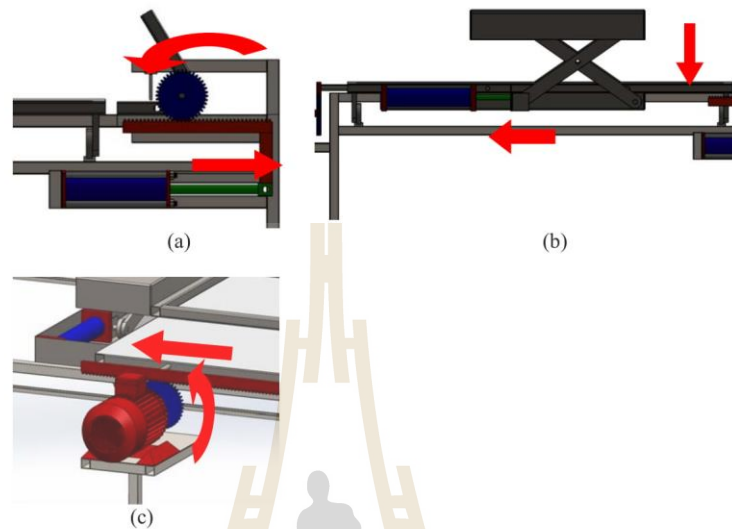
(a) Grass sheet folding mechanism (b) Grass sheet pressing mechanism and (c) Grass sheet feeding mechanism
